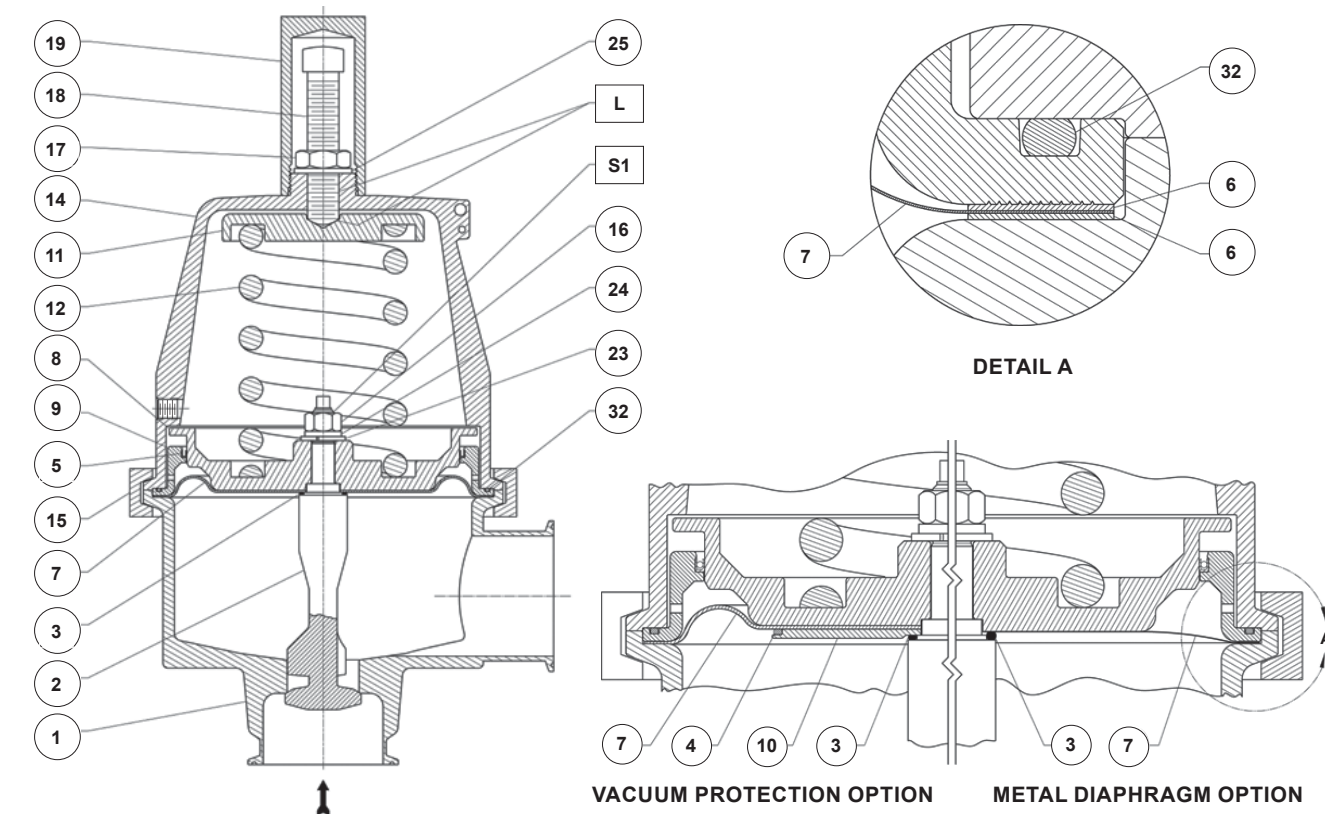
Type SR5 Sanitary Regulator Assembly with Pressure Loaded Spring Case
